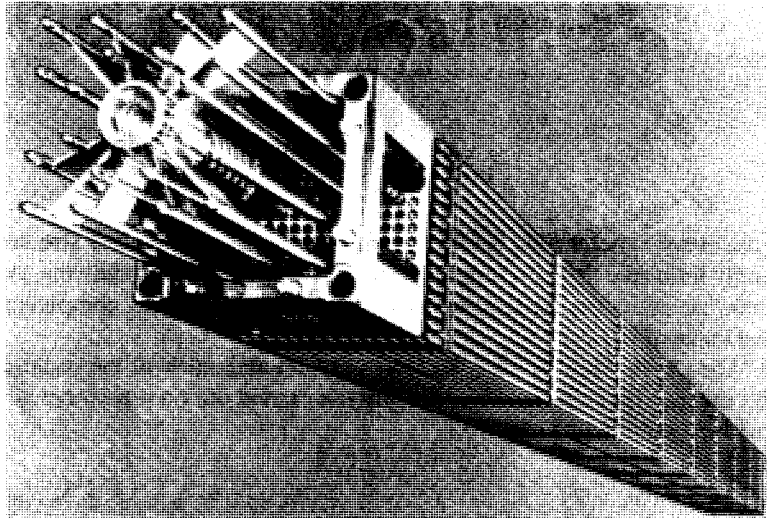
Fuel Element Nozzle in the fuel assembly structure
